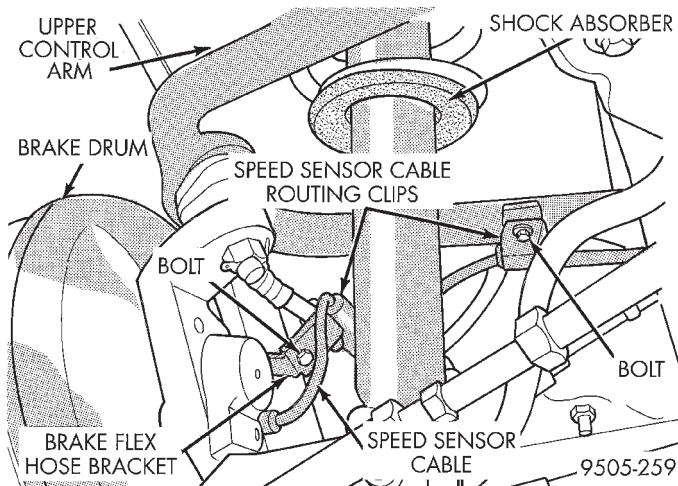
Speed Sensor Cable Attachment To Control Arm
